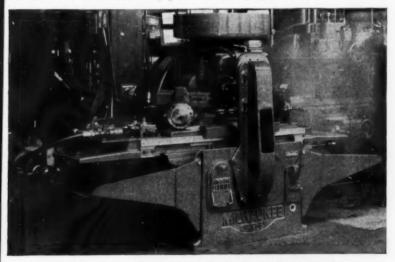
General view of gear gashing machine showing head and fixtures in place. Note index plate, cover of which has been removed.
